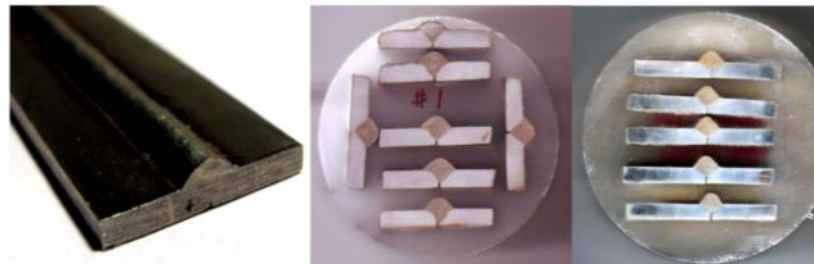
cutcheck cross sections of butt welds
